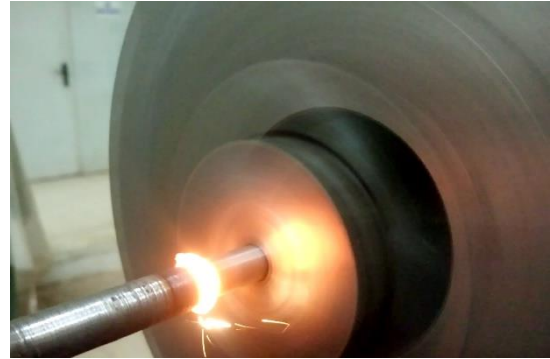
Rotary friction welding of stainless steel to ordinary steel.
